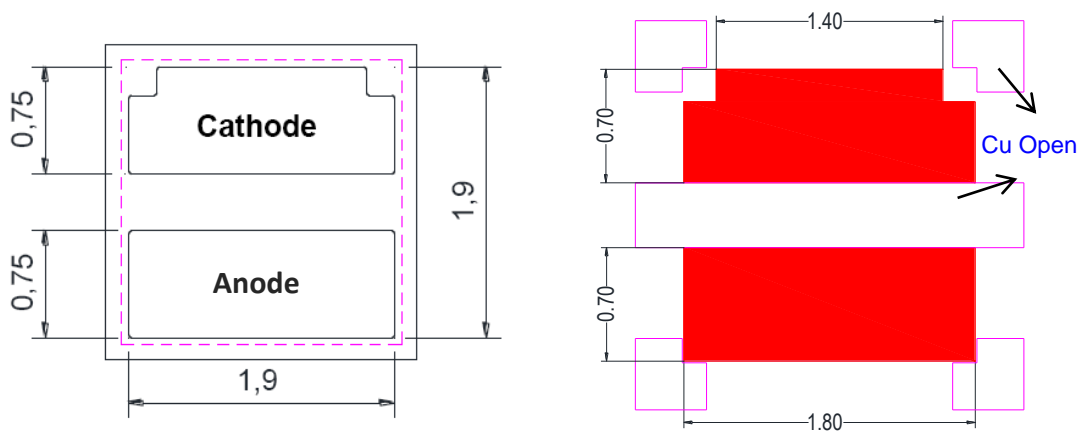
(d). Referenced PCB Footprint for. Y22 All dimensions in mm.
